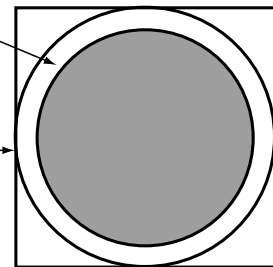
Footprint - 5 mils stencil - solder mask defined
